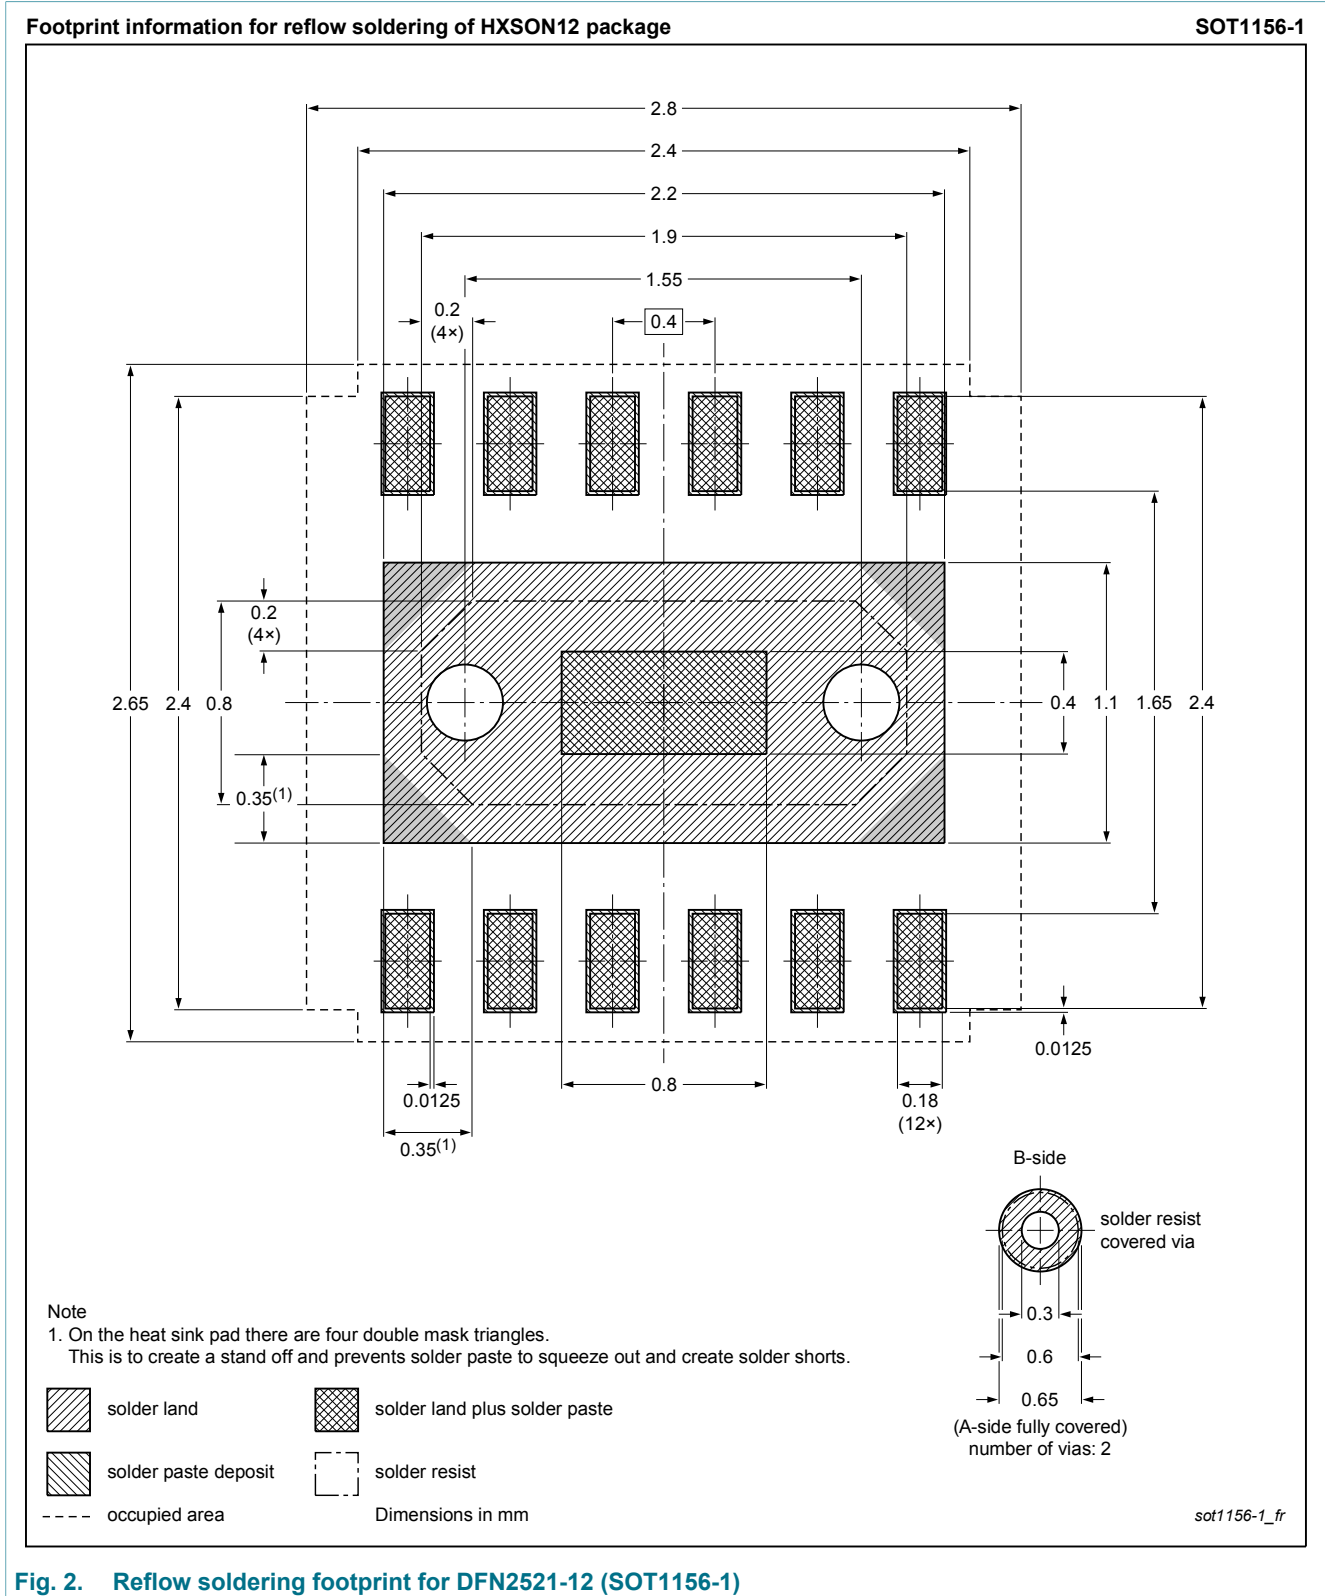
Reflow soldering footprint for DFN2521-12 (SOT1156-1)
